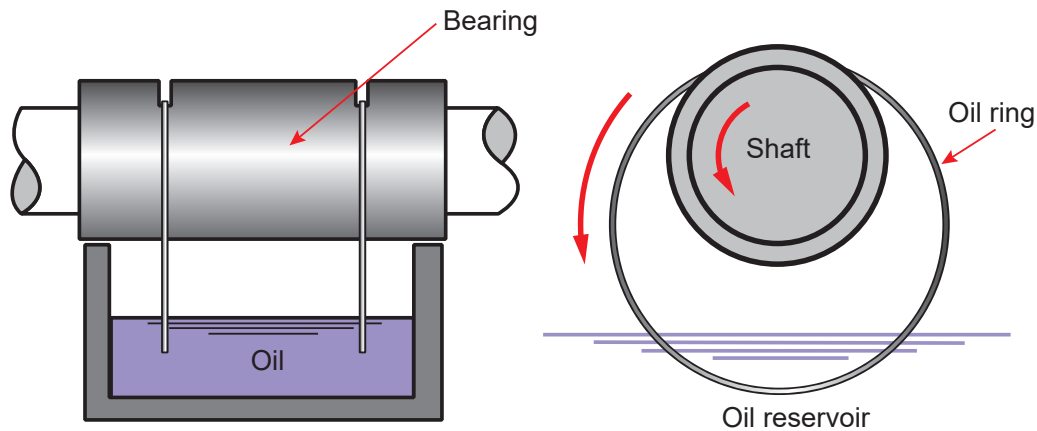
Shell or Sleeve Bearing Lubrication
